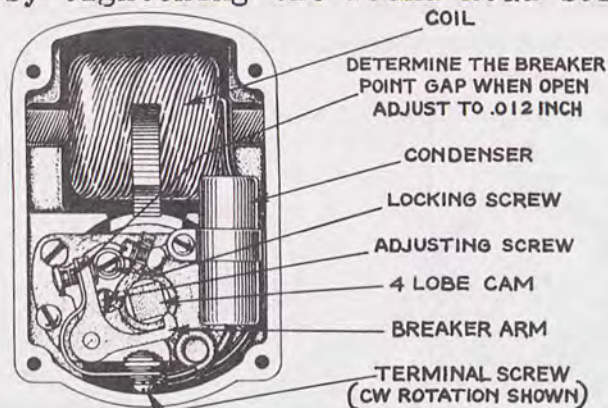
OPEN END VIEW - POINT ADJUSTMENT
